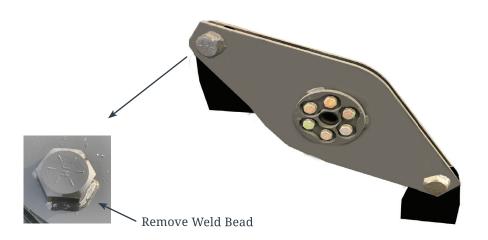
A - BLADE HOLDER BOLT WELD BEAD REMOVAL
